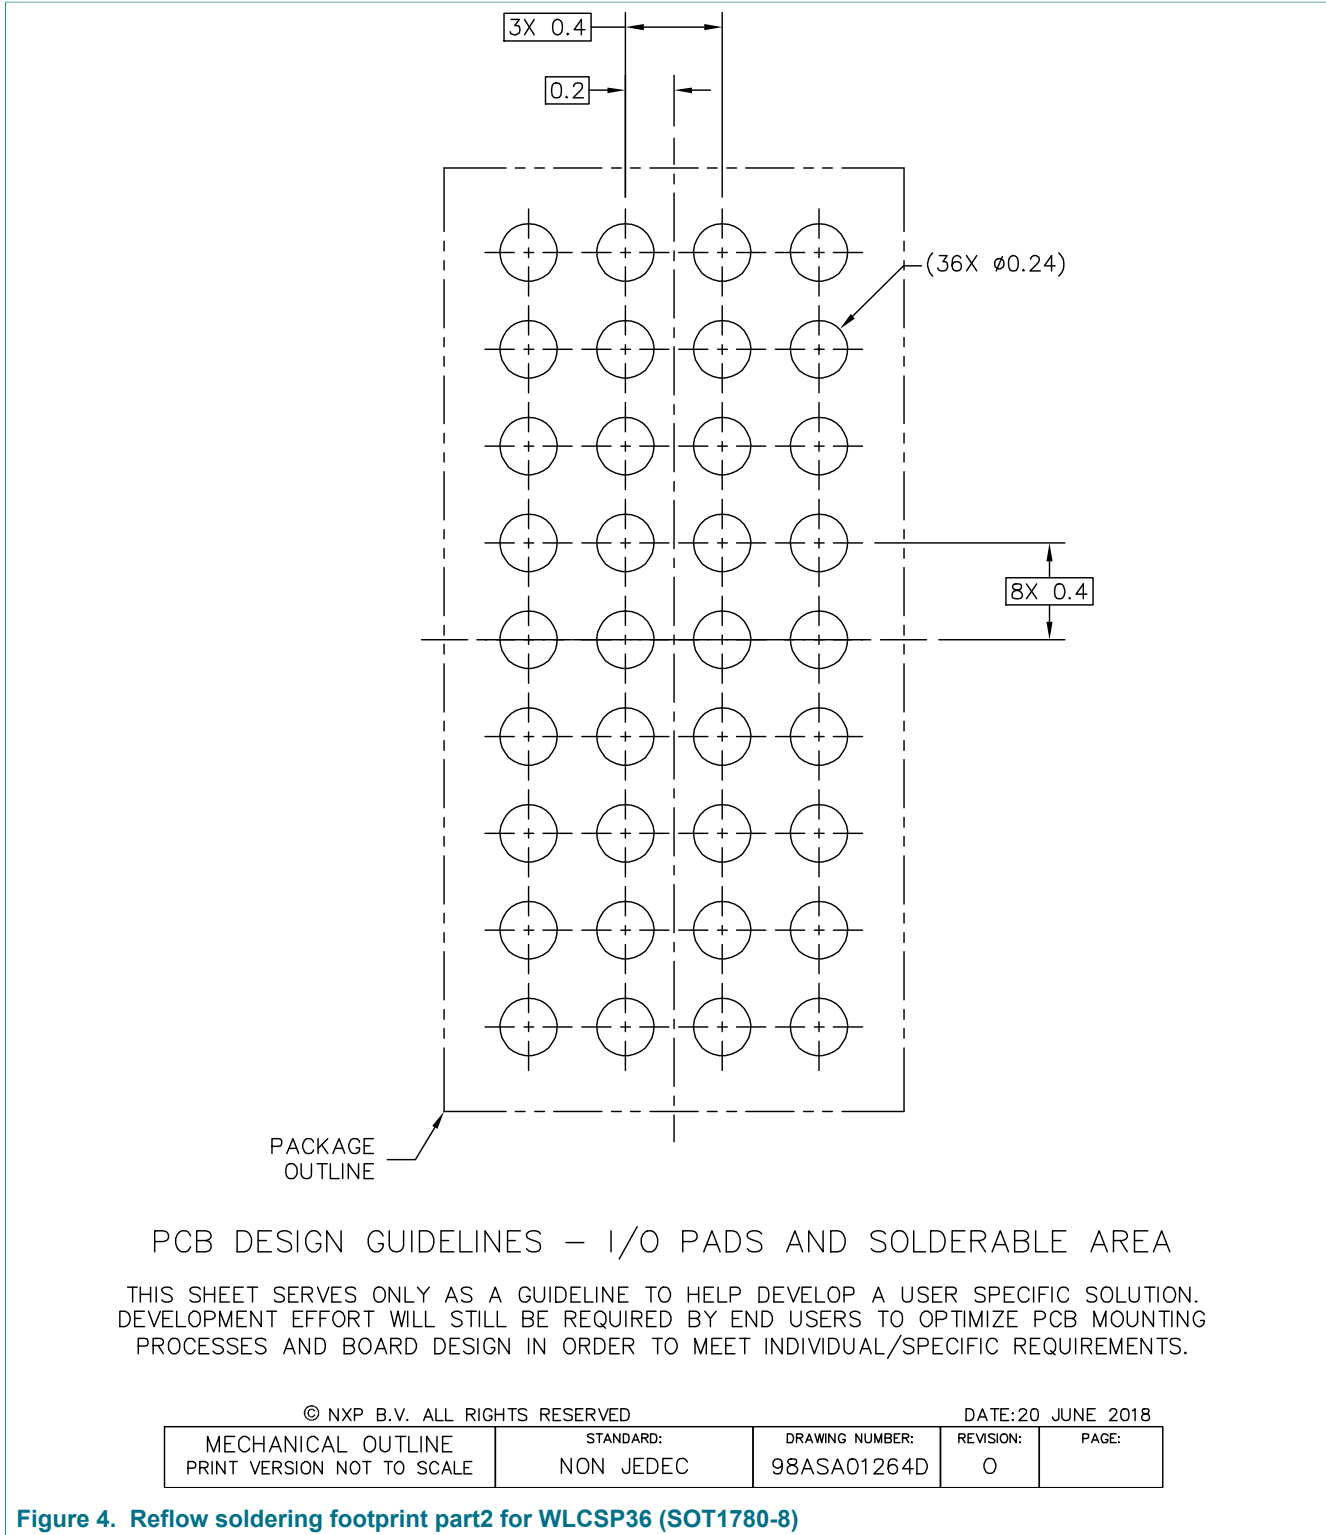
Reflow soldering footprint part2 for WLCSP36 (SOT1780-8)
